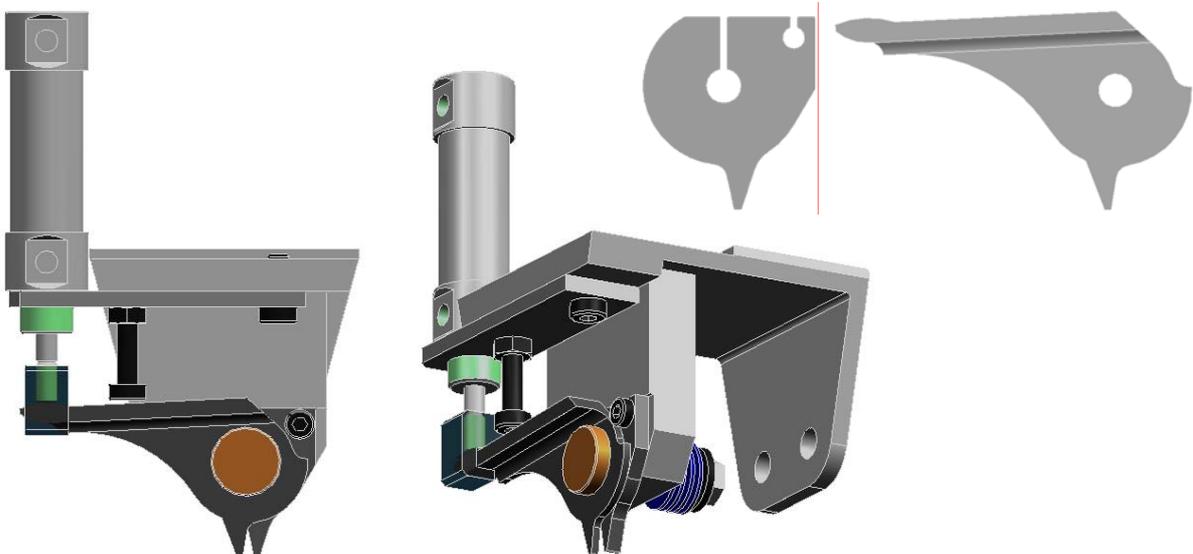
Wire cutter. Up right, closeup of EDM cutting path for scissor blades.
